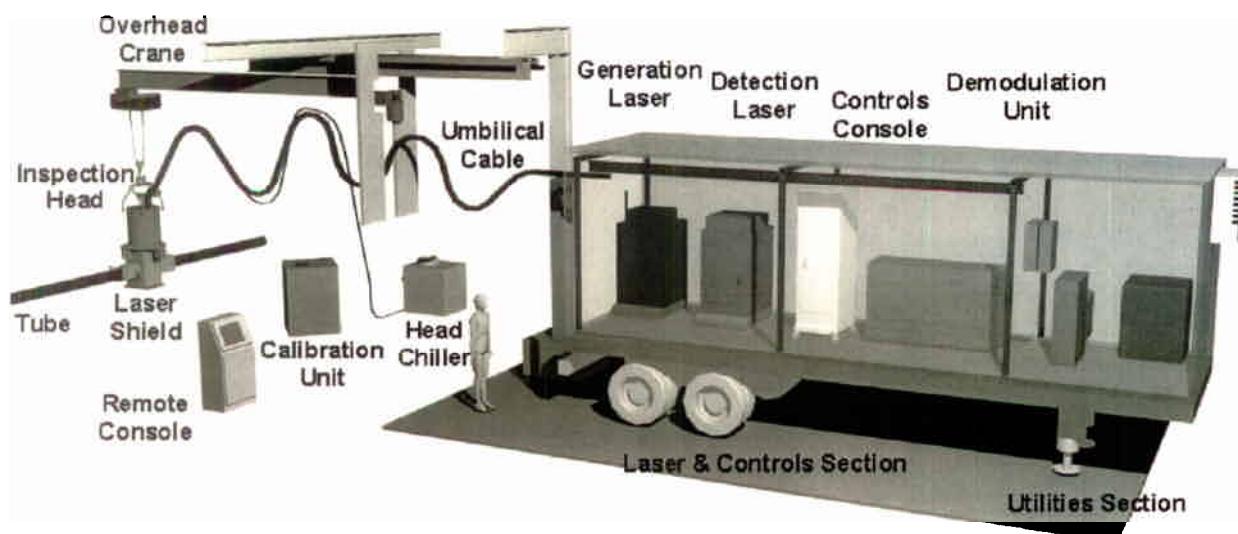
Schematic drawing of the LUT gauge in the tube mill.
